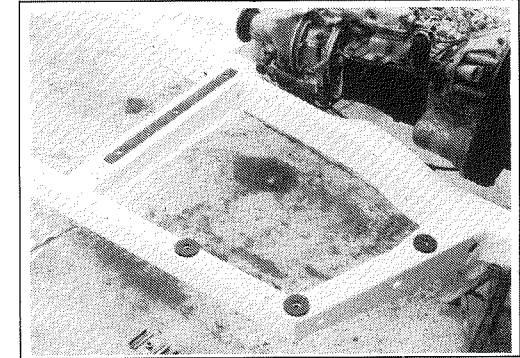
Lay out the front rubber pads plus rubberised material sealing strips, the latter set on top of a little dum dum rubber sealer with another layer of the same on top.
